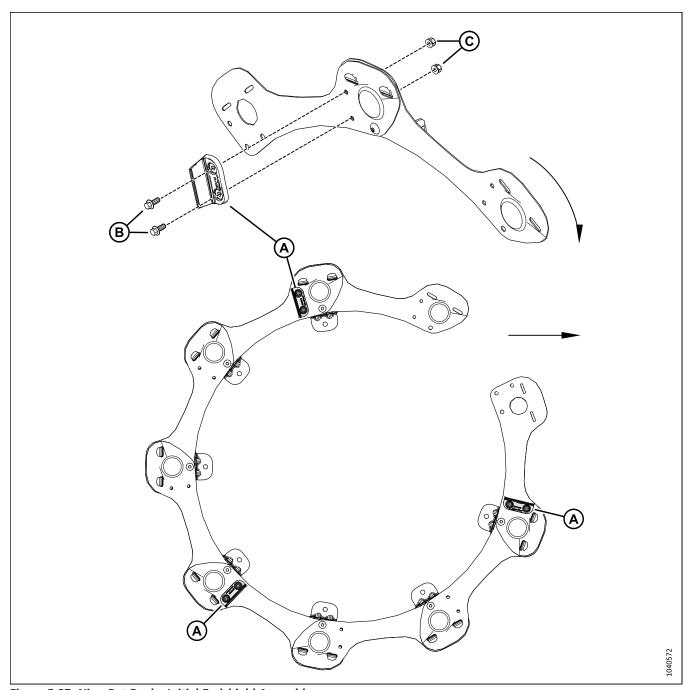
Nine-Bat Reel – Initial Endshield Assembly
